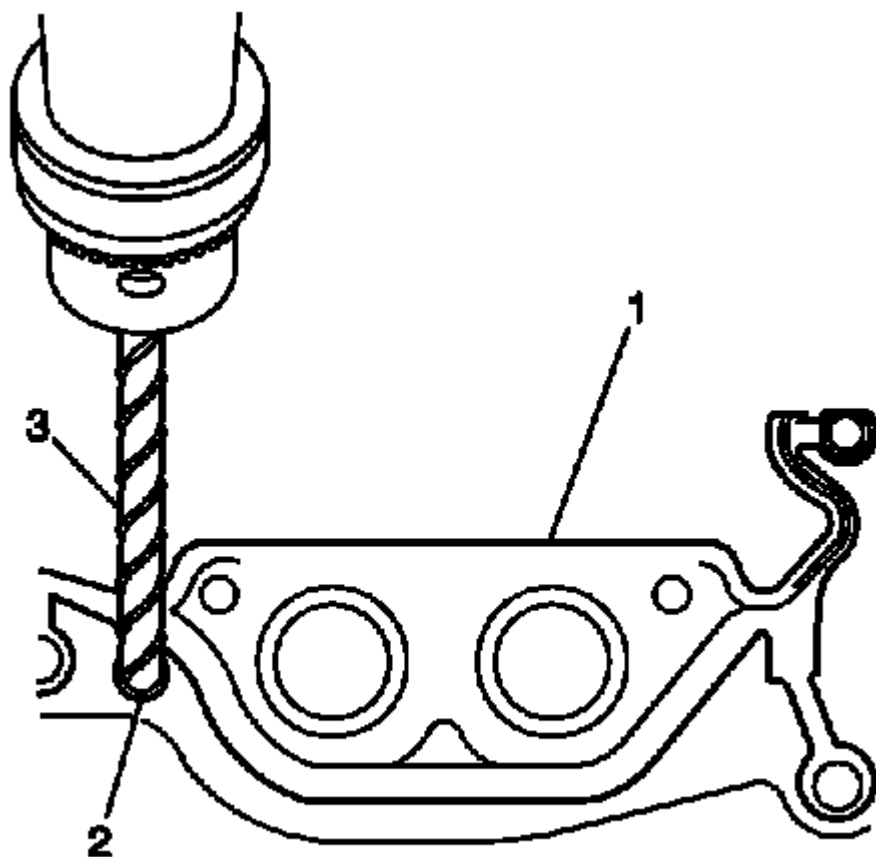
Drilling Oil Pan Gasket Retaining Rivets
